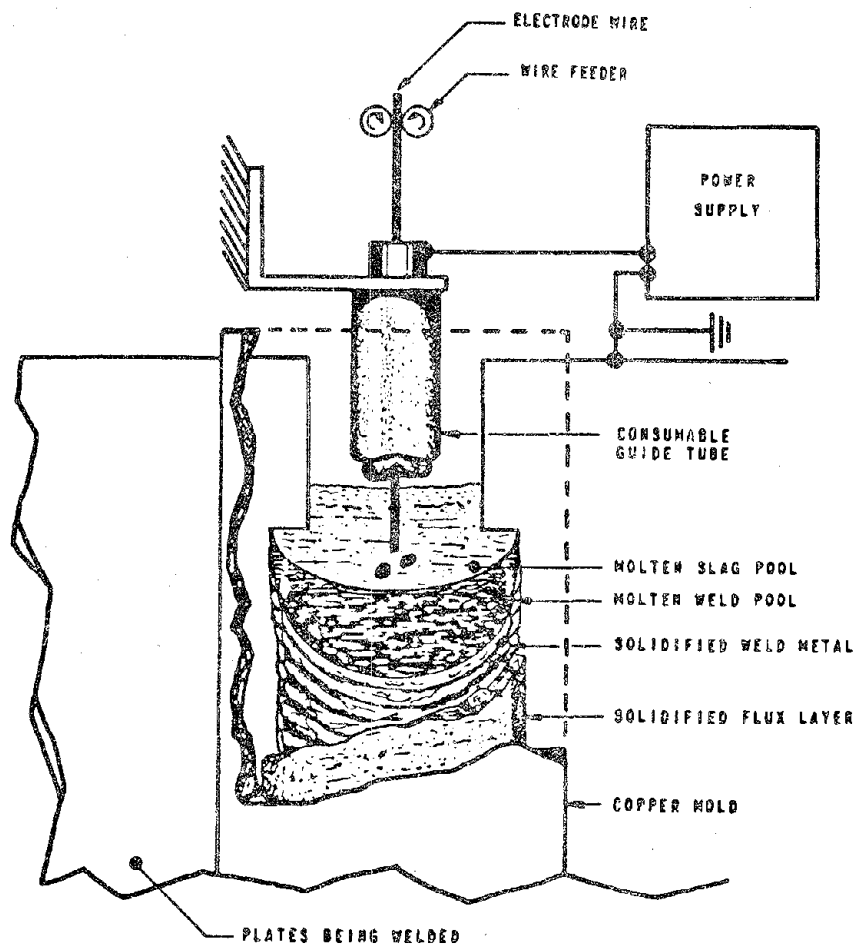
Schematic illustration of consumable guide electroslag welding process. (Schematic.)
